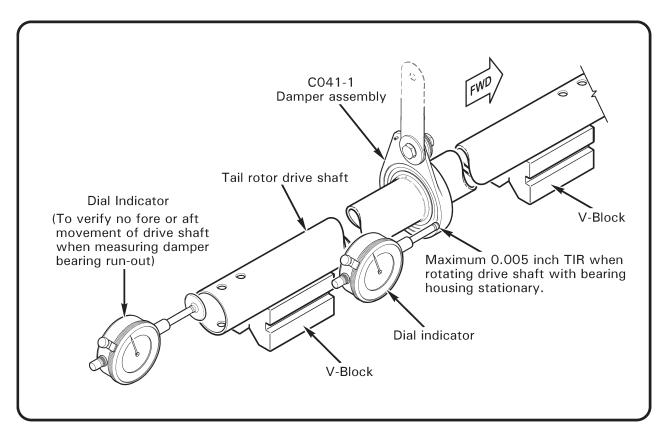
C DAMPER BEARING RUN-OUT INSPECTION
